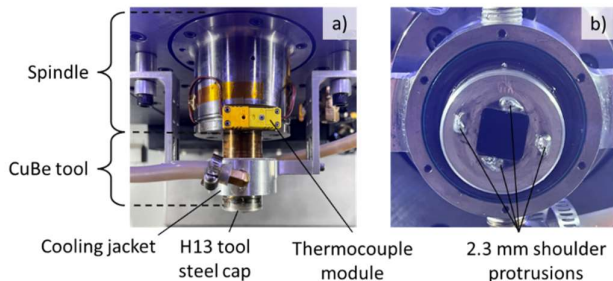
a) CuBe tool with H13 tool steel cap, thermocouple connection, and cooling jacket. b) Bottom view of tool showing shoulder face protrusions and 12.7 mm square feedstock bore.
